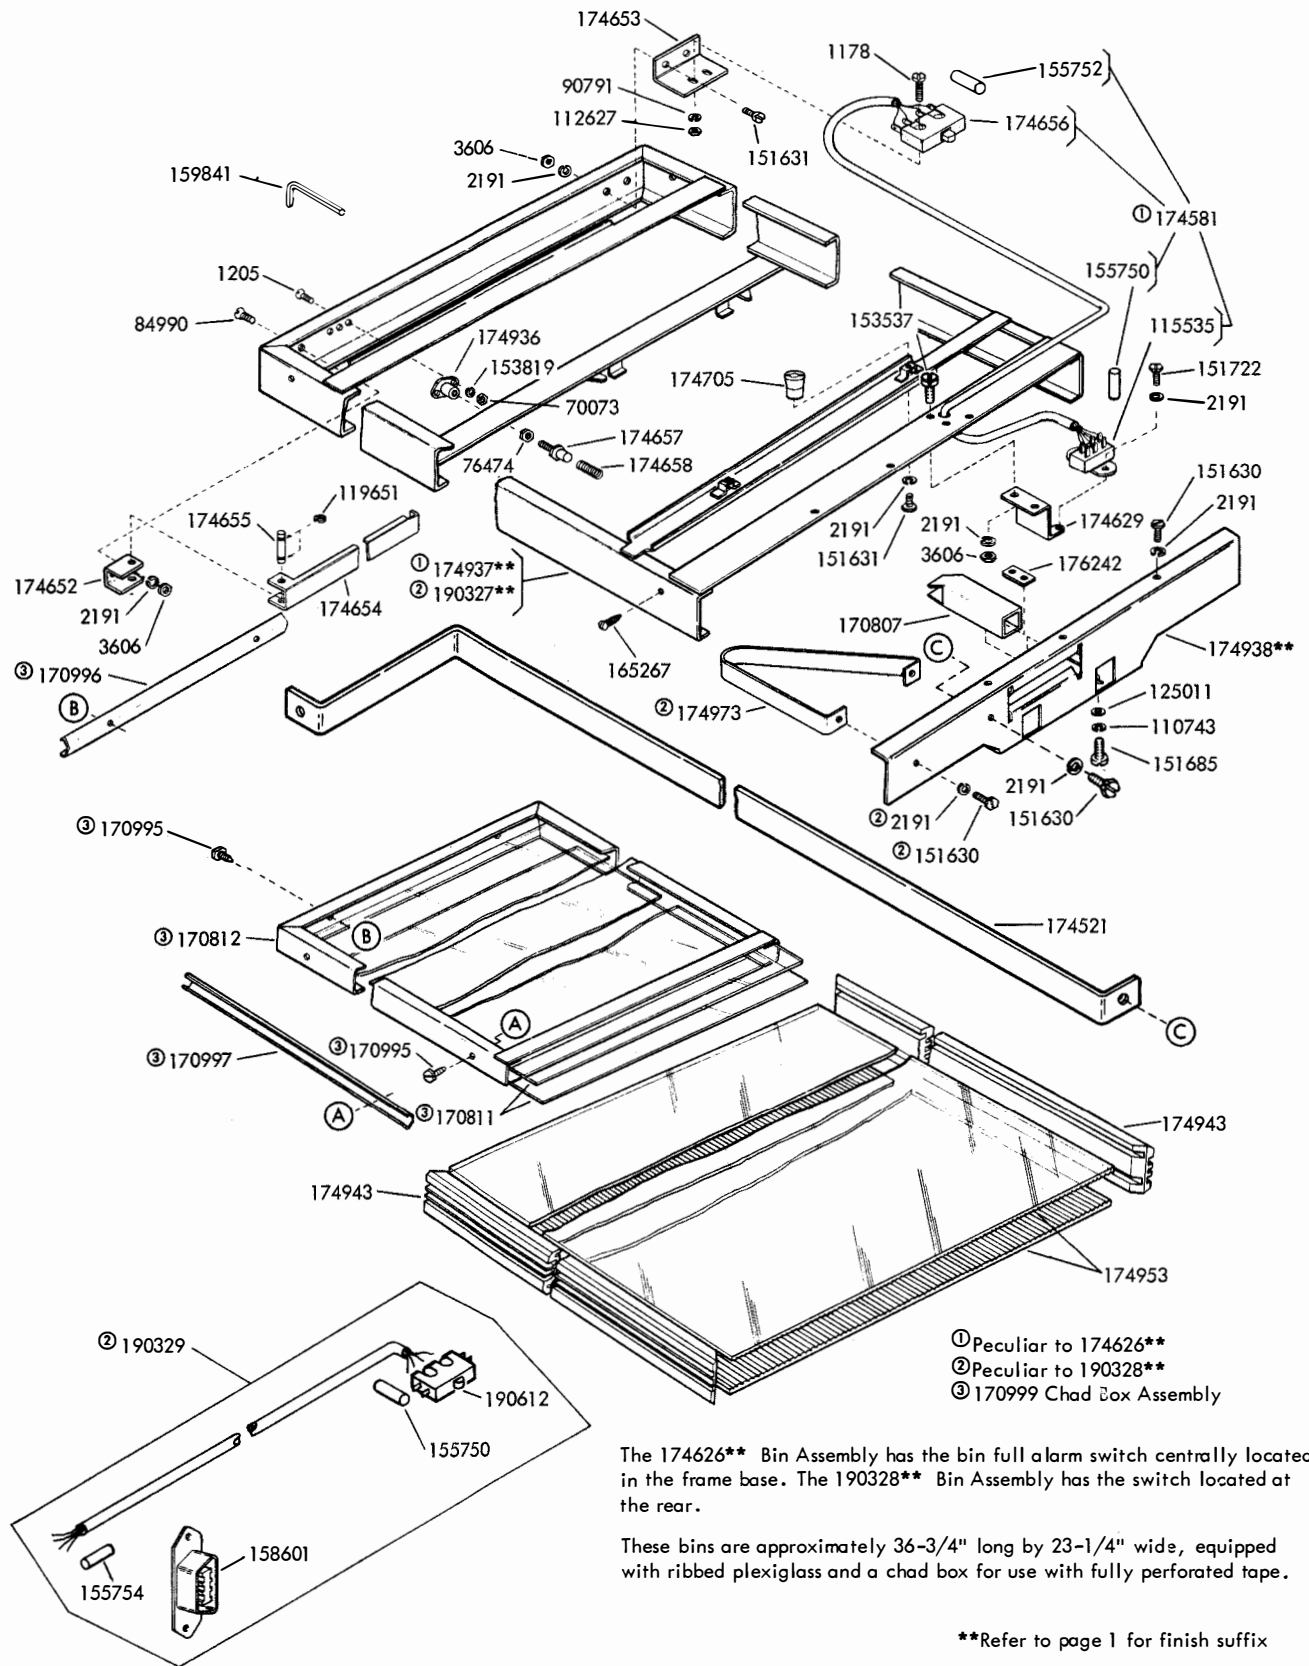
174626 and 190328 TAPE STORAGE BIN ASSEMBLIES (With Motor)
